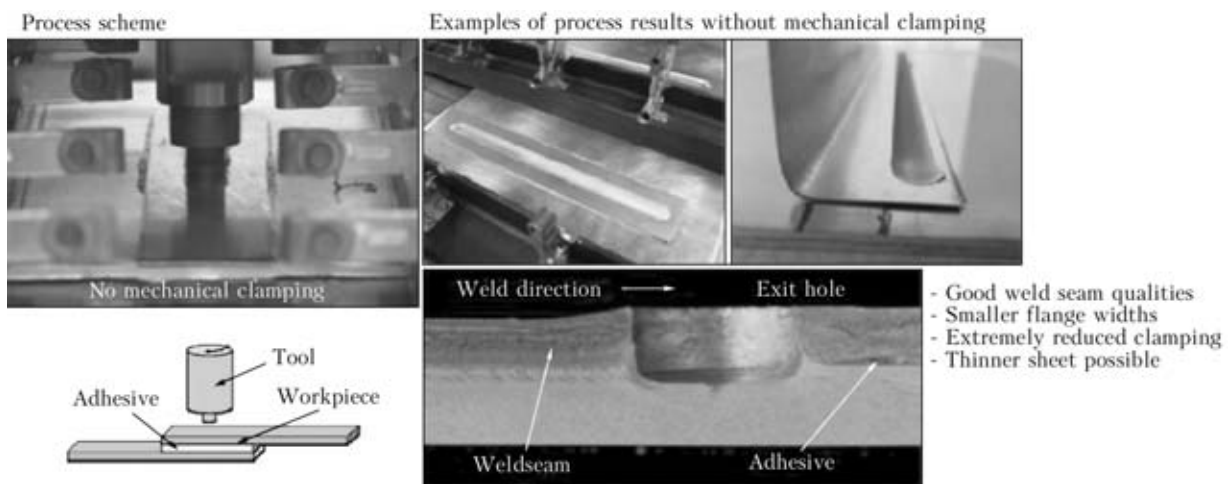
Friction stir welding combined with adhesive bonding
